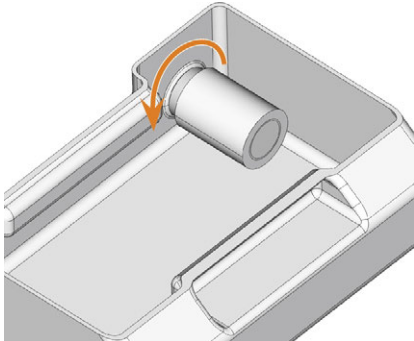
UNSCREWING THE COOLING LIQUID FILTER
